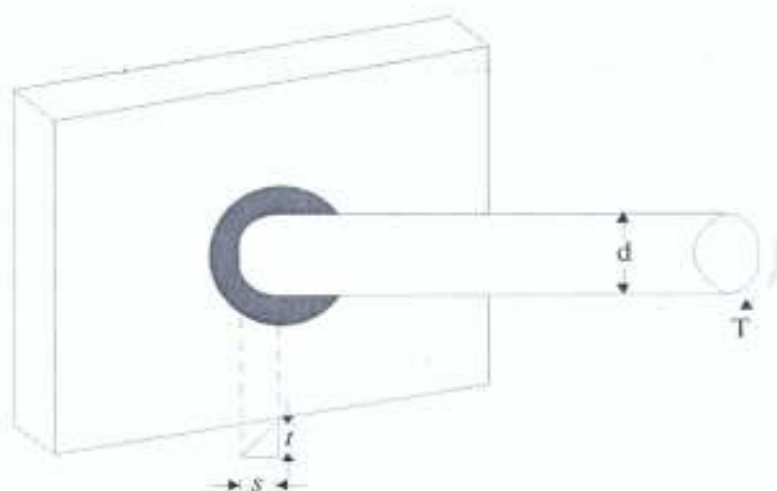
Circular Fillet Weld Subjected to Torsion Load
